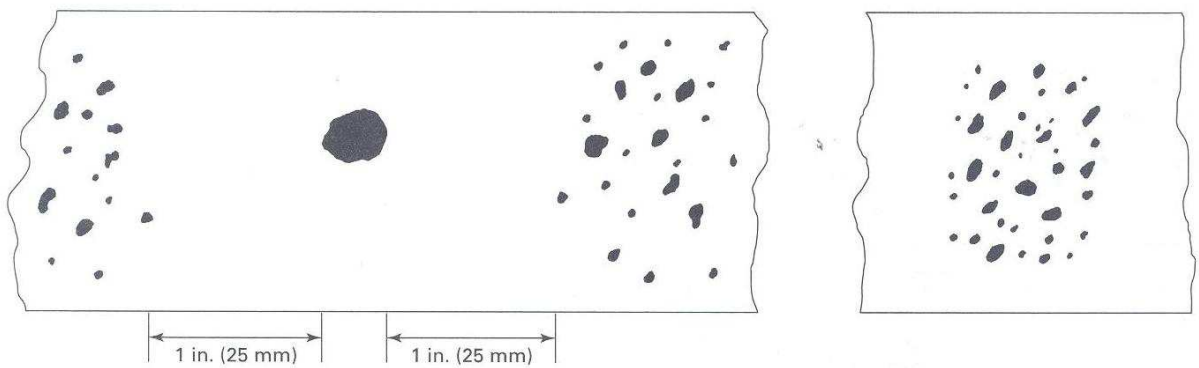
CHARTS FOR t OVER 2 in. (51 mm) TO 4 in. (102 mm), INCLUSIVE
